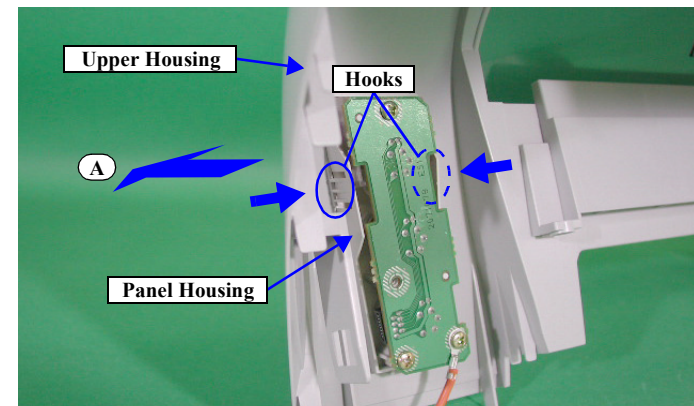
Panel Housing/C486 PNL Board Removal 1
